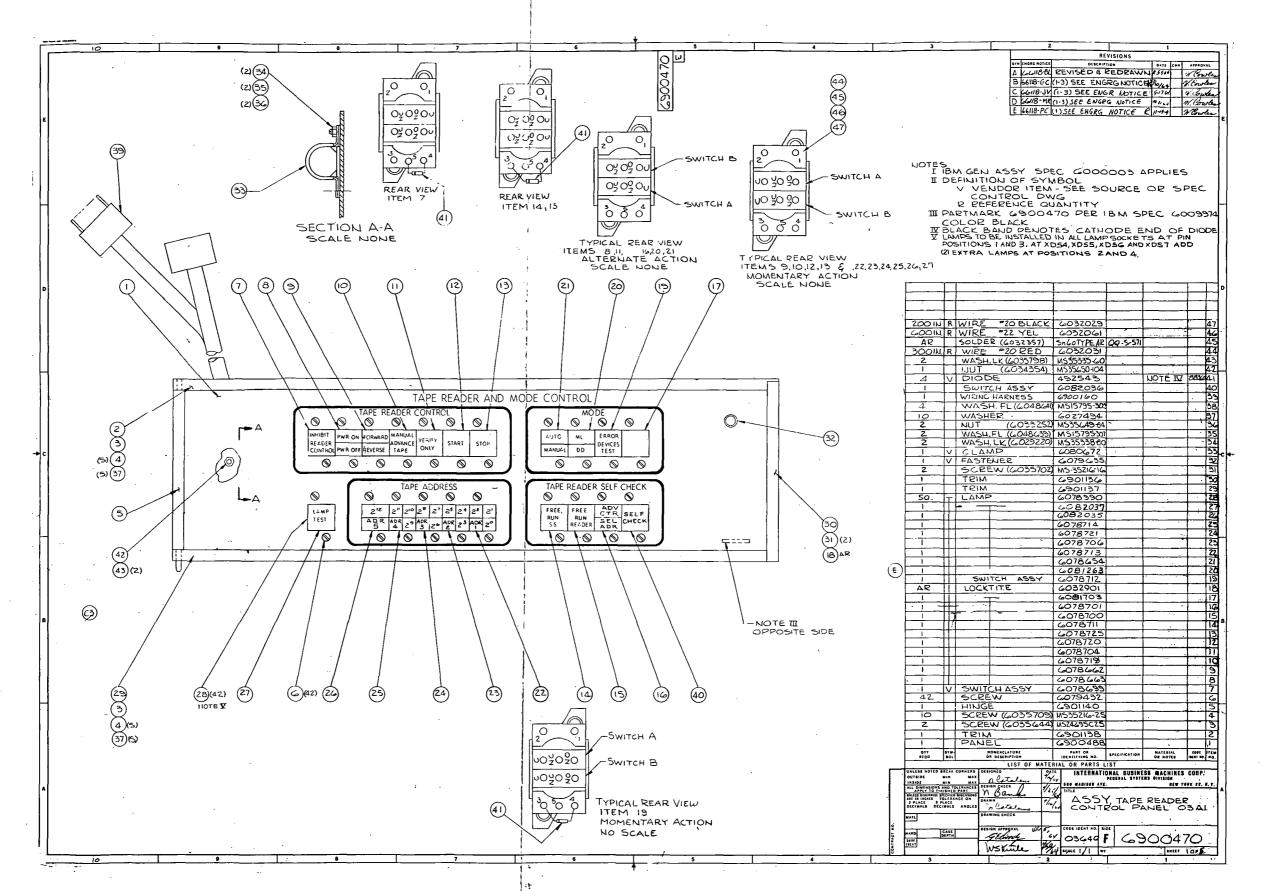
Tape Reader Control Panel Assembly (03A1) Assembly Drawing
